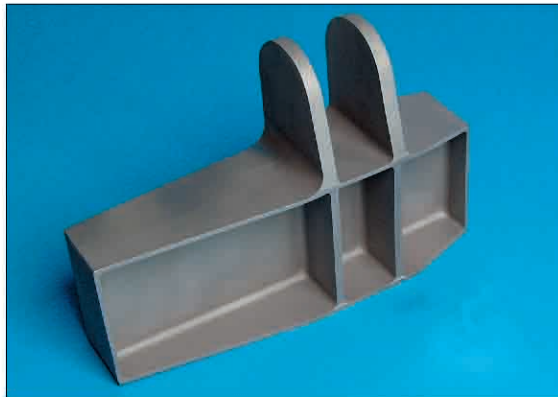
As-cast horizontal tail actuator clevis mount.
